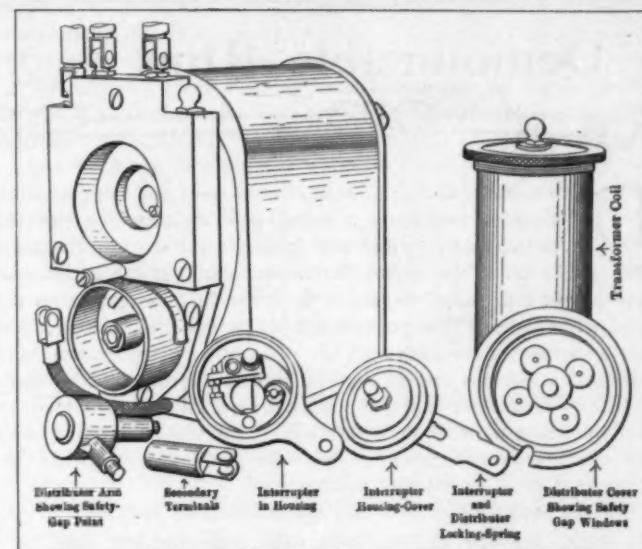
Connecticut magneto partly assembled showing the relations of the parts.
